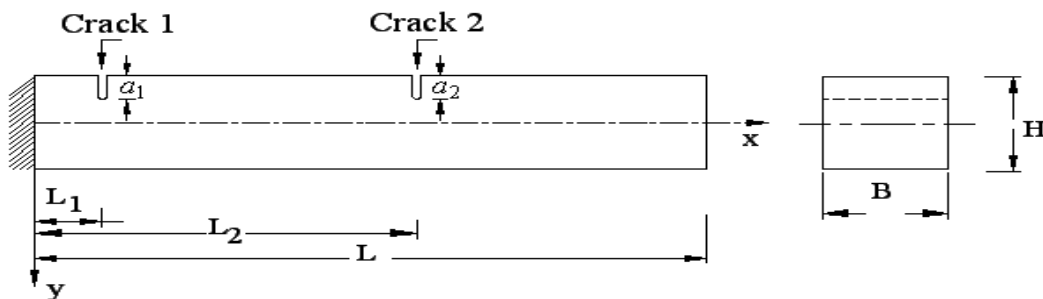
Design of a cantilever beam with two open U-shape cracks. First crack details: $L_1/L = 0.1$; $a_1/H = 0.3$; Second crack details: $L_2/L = 0.6$; $a_2/H = 0.3$.
